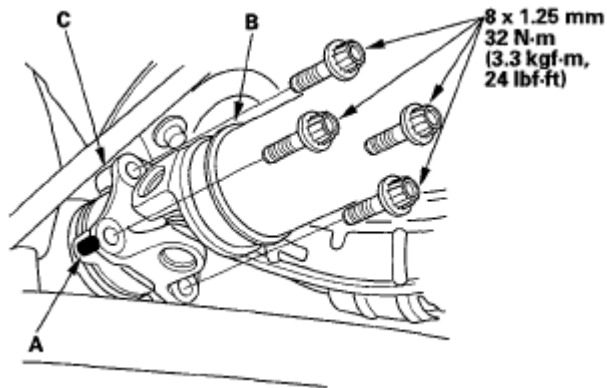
Identifying Reference Mark No. 1 Propeller Shaft And Transfer Companion Flange With Torque Specification
